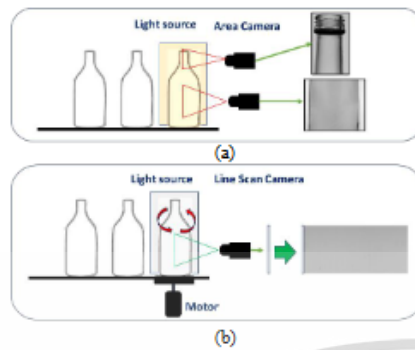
Inspection machine (a) Straight glass bottle inspection machine (b) Rotating glass bottle inspection machine
